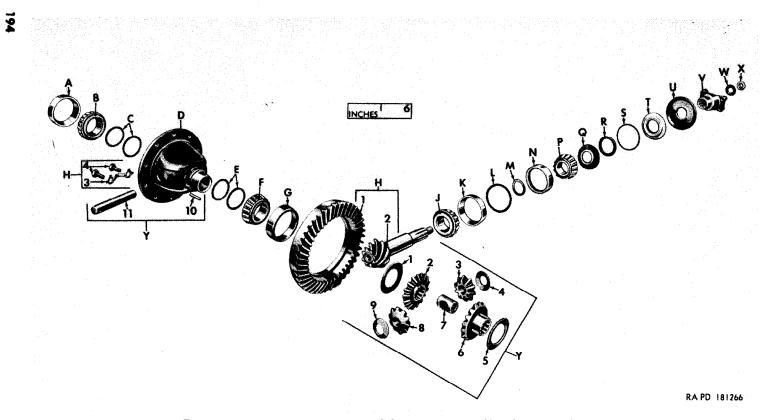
Rear axle differential and drive pinion assembly-disassembled view.
